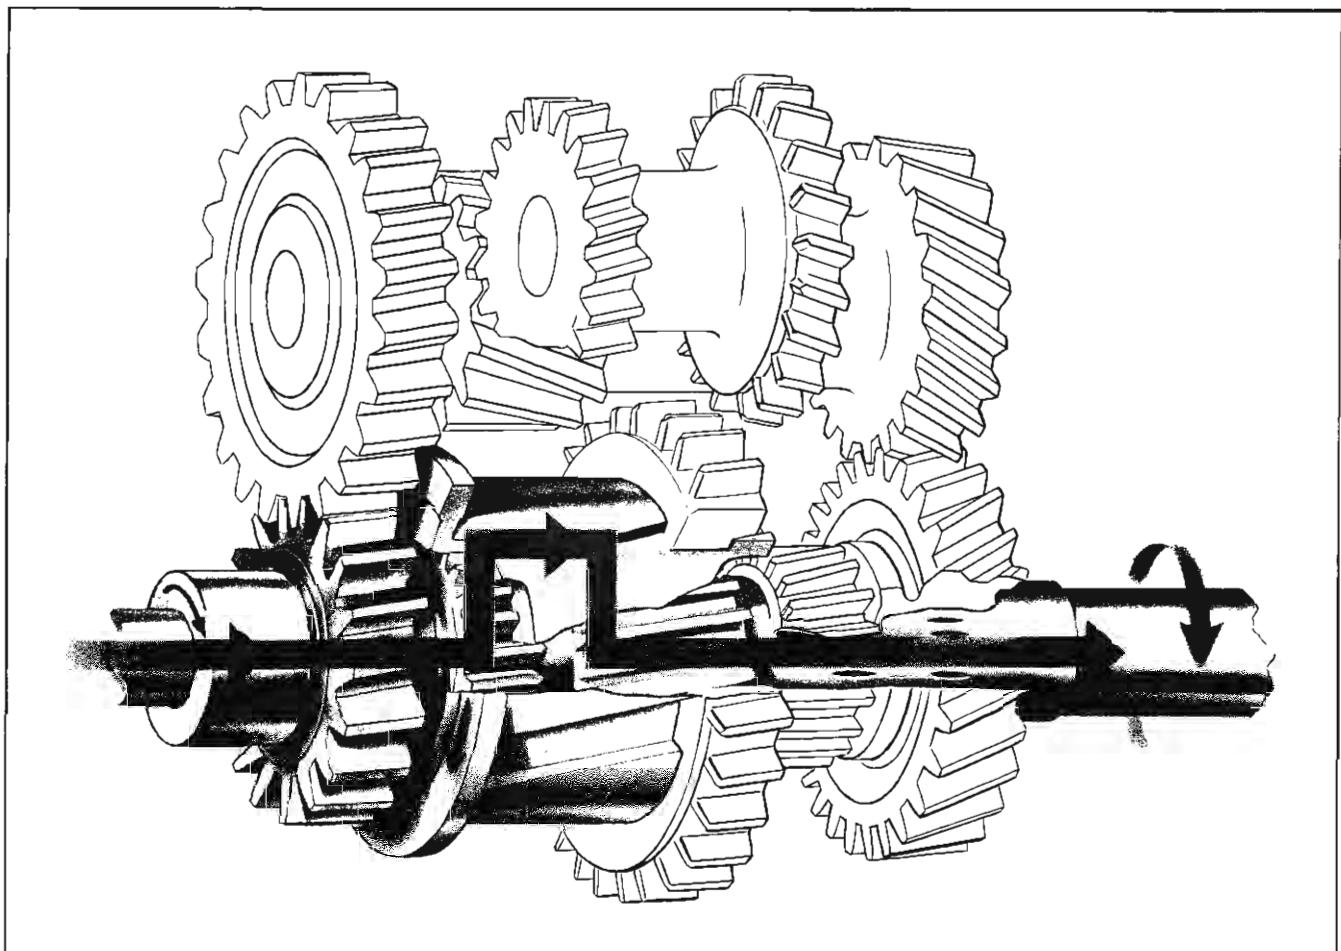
Power Flow with Transmission Gears in Third Gear Position
